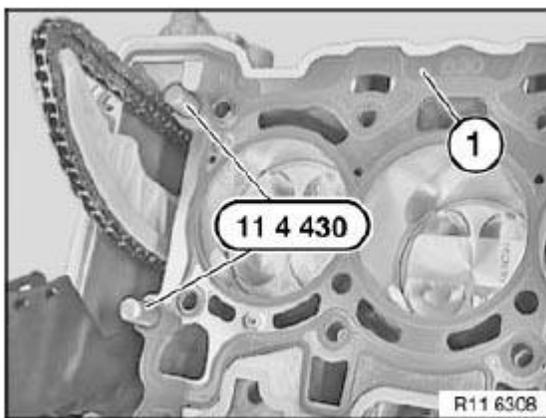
Inserting Special Tool (11 4 430) Into Bores
